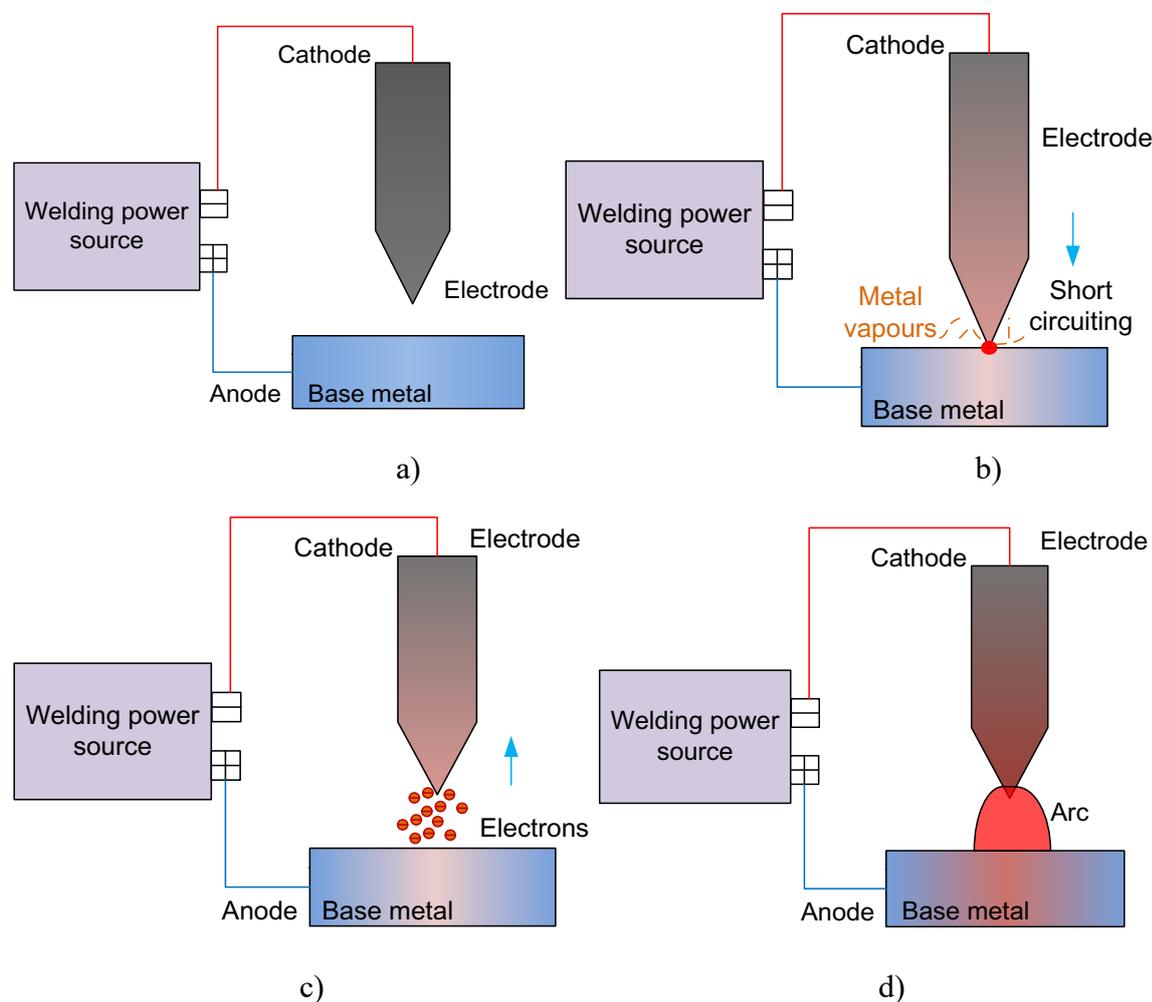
Schematic diagram showing four steps of welding arc initiation by touch start method a) connect electrode and base metal to the power source, b) touch the parent metal for short-circuiting, c) withdraw electrode and d) establish welding arc.
